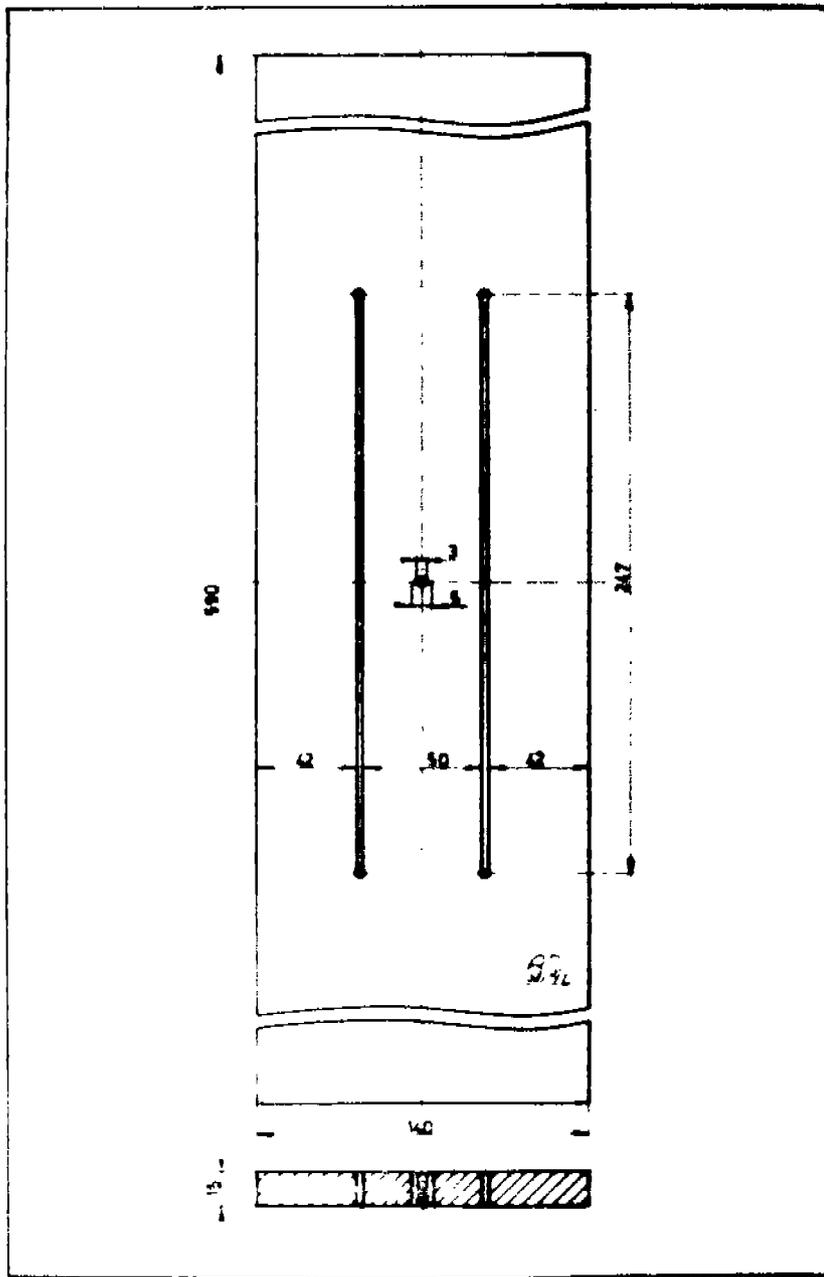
FRAME-TYPE SPECIMEN USED TO STUDY THE CONDITIONS NECESSARY TO PROVOKE LOW-STRESS BRITTLE FRACTURE.
